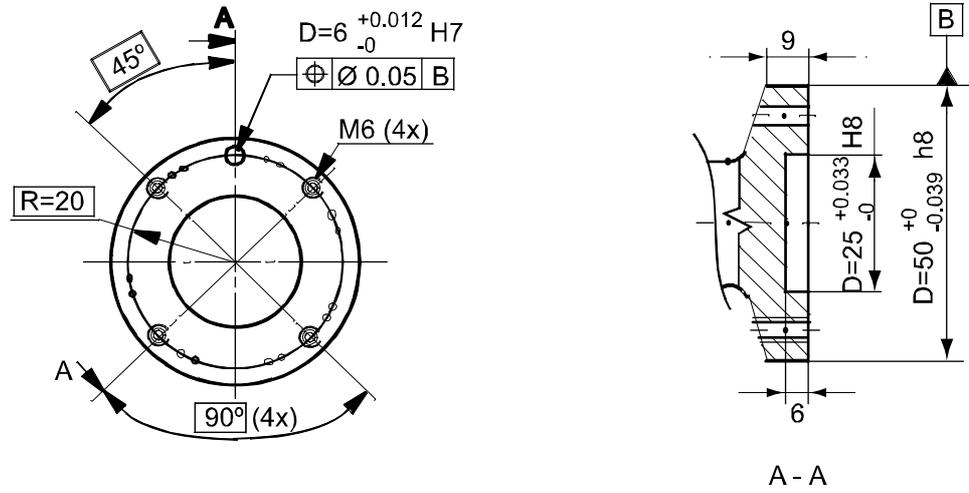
The mechanical interface, mounting flange (dimensions in mm).
